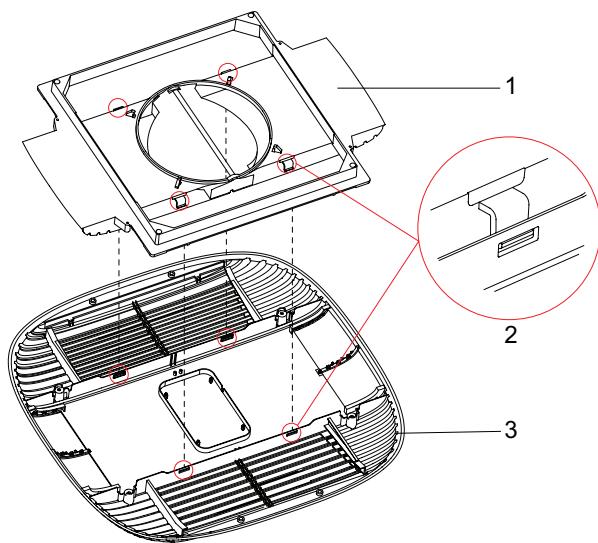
Attaching the air distributor assembly to the mounting bracket
